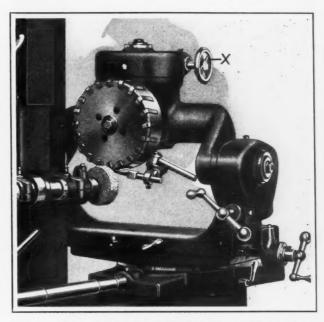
Relative Positions of the Milling Cutter and Grinding Wheel in grinding the Face of Milling Cutter Blades
